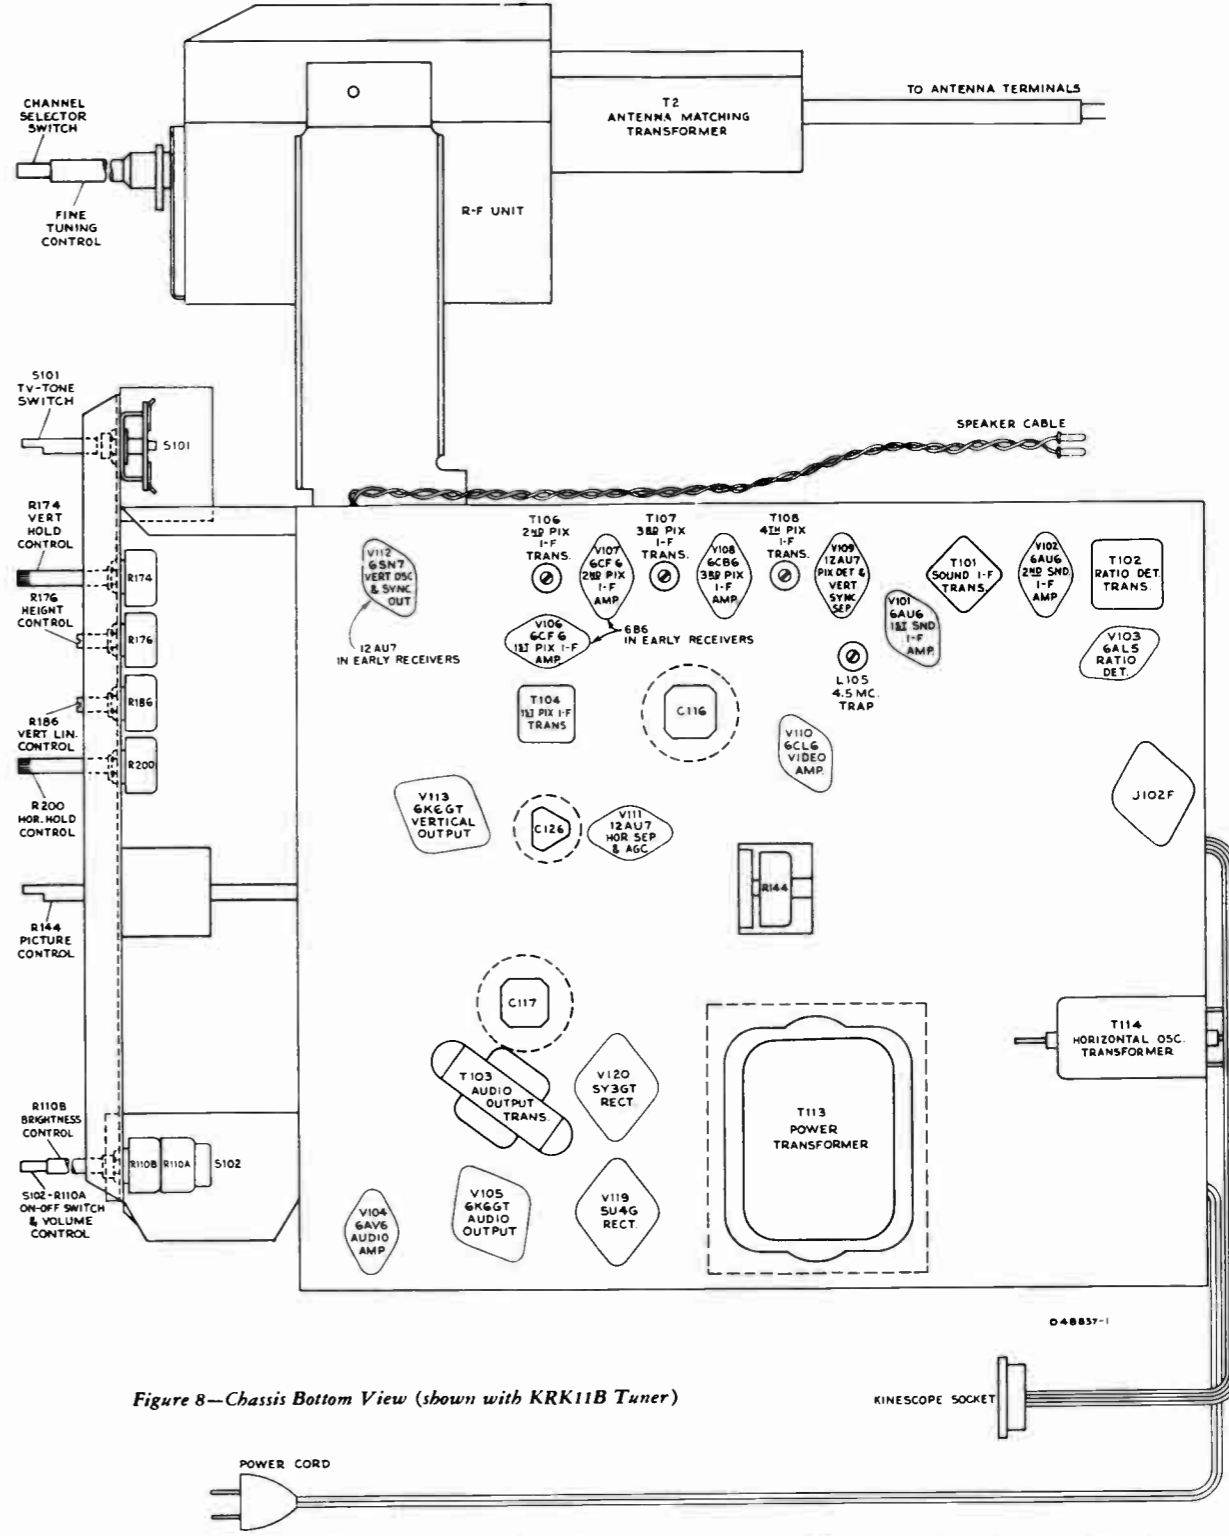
Chassis Bottom View (shown with KRK11B Tuner)
